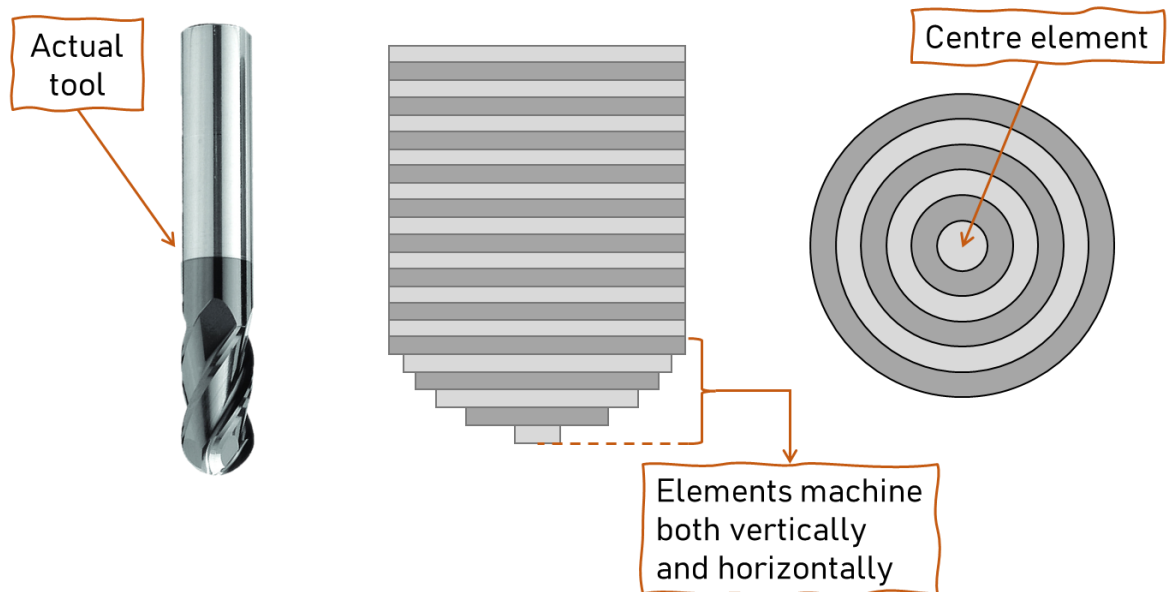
Ball nose cutting tool mesh Left: Side view of the actual tool. Centre: Side view of mesh. Right: Bottom view of the mesh
